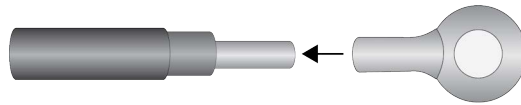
Sliding the Ring Terminal Lug on the Grounding Wire
